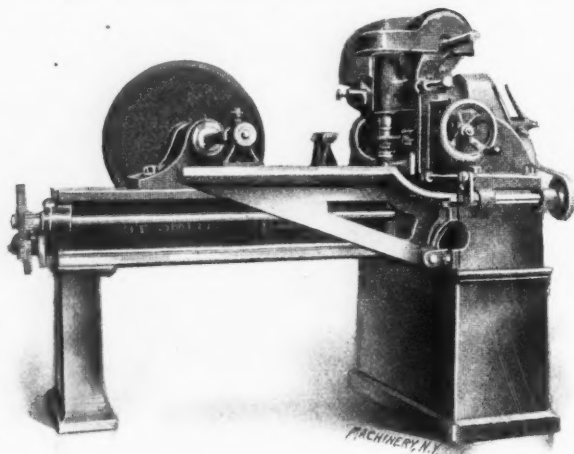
An Example of Machine with L-shaped Bed, as made by G. F. Smith, Ltd.
